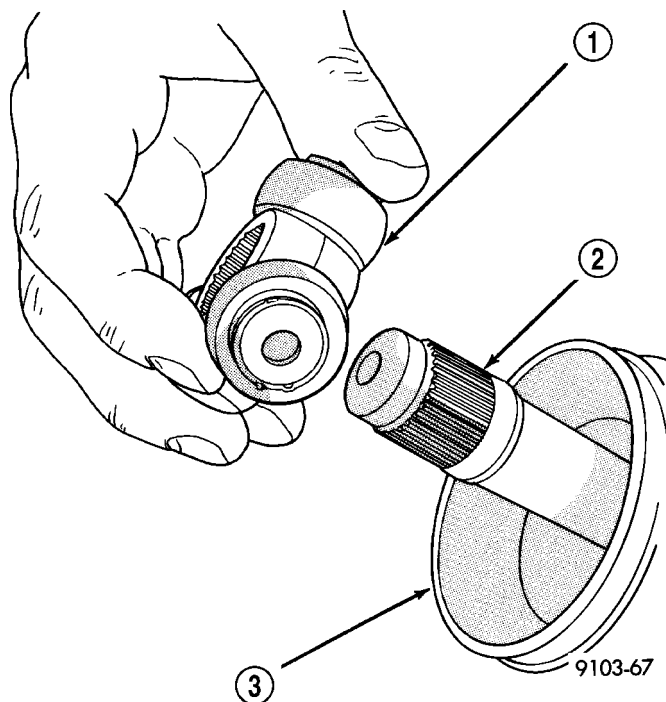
Slide Tripod Onto The Interconnecting Shaft
